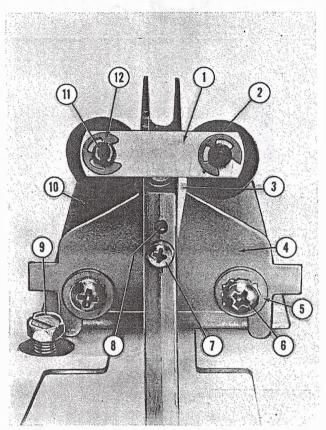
BRACKET AND ROLLER ASSEMBLY, LIFT ARM GUIDE, 2400
